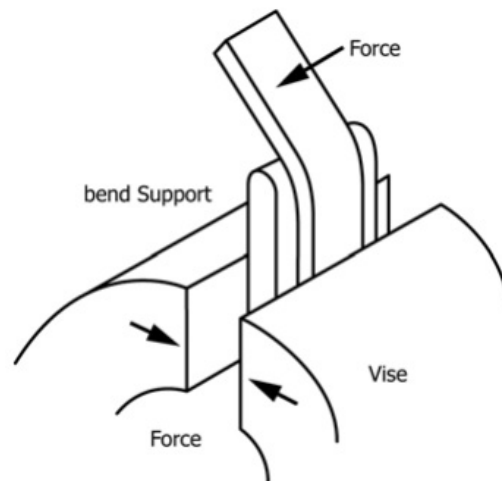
Semi-guided bend test of thin specimens: ASTM E 290 ("ASTM E290-14", 2019).
